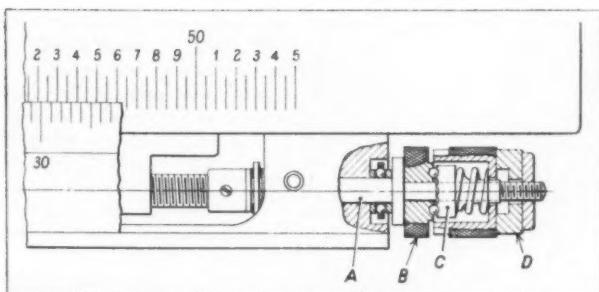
Cut-away View of the Measuring Pressure Control which is Incorporated in the Gray Ritefeel Vernier Gauges
